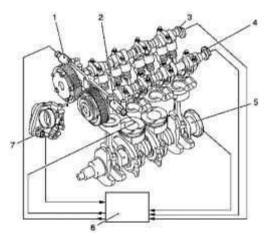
Node camshaft engine Z 18 XER DOHC-I: 1 - Hydraulic Solenoid valve camshaft drive intake valves, 2 - Hydraulic Solenoid valve camshaft drive of the exhaust valves, 3 - sensor camshaft drive intake valves, 4 - sensor camshaft drive exhaust valves 5 - crankshaft sensor, 6 - engine control module; 7 - choke tube
